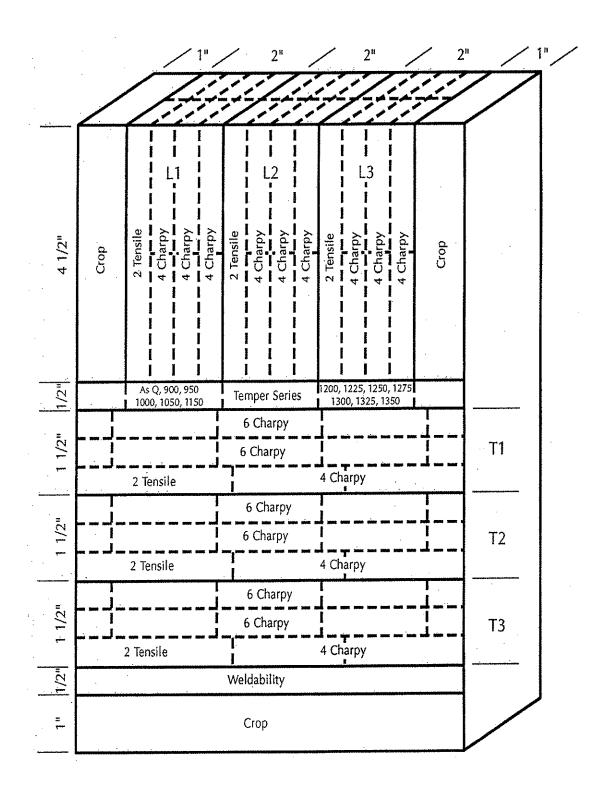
Machining of Sections A and B from Figure 1 to Test Specimens
